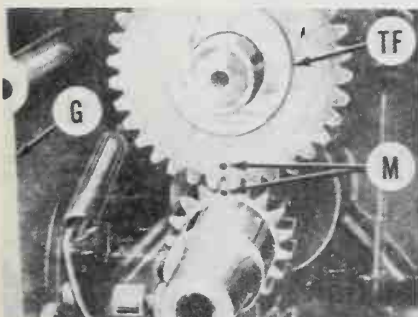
View of camshaft and crankshaft timing marks (M). Measure depth of camshaft thrust face (TF) from crankcase gasket surface (G) as outlined in text.
